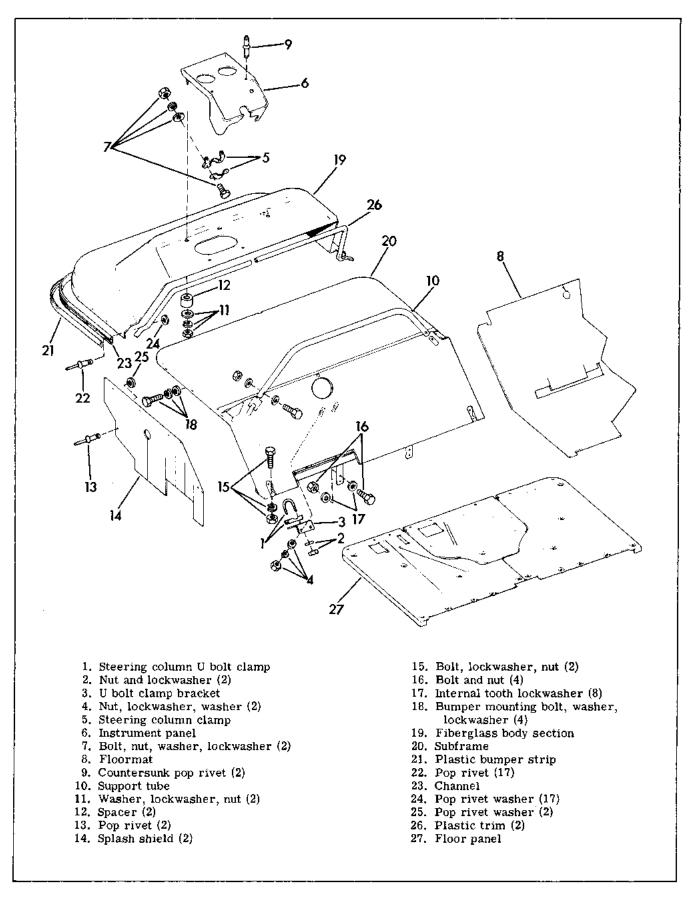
I-4. Front Body Section, 4 Wheel Car - Exploded View
